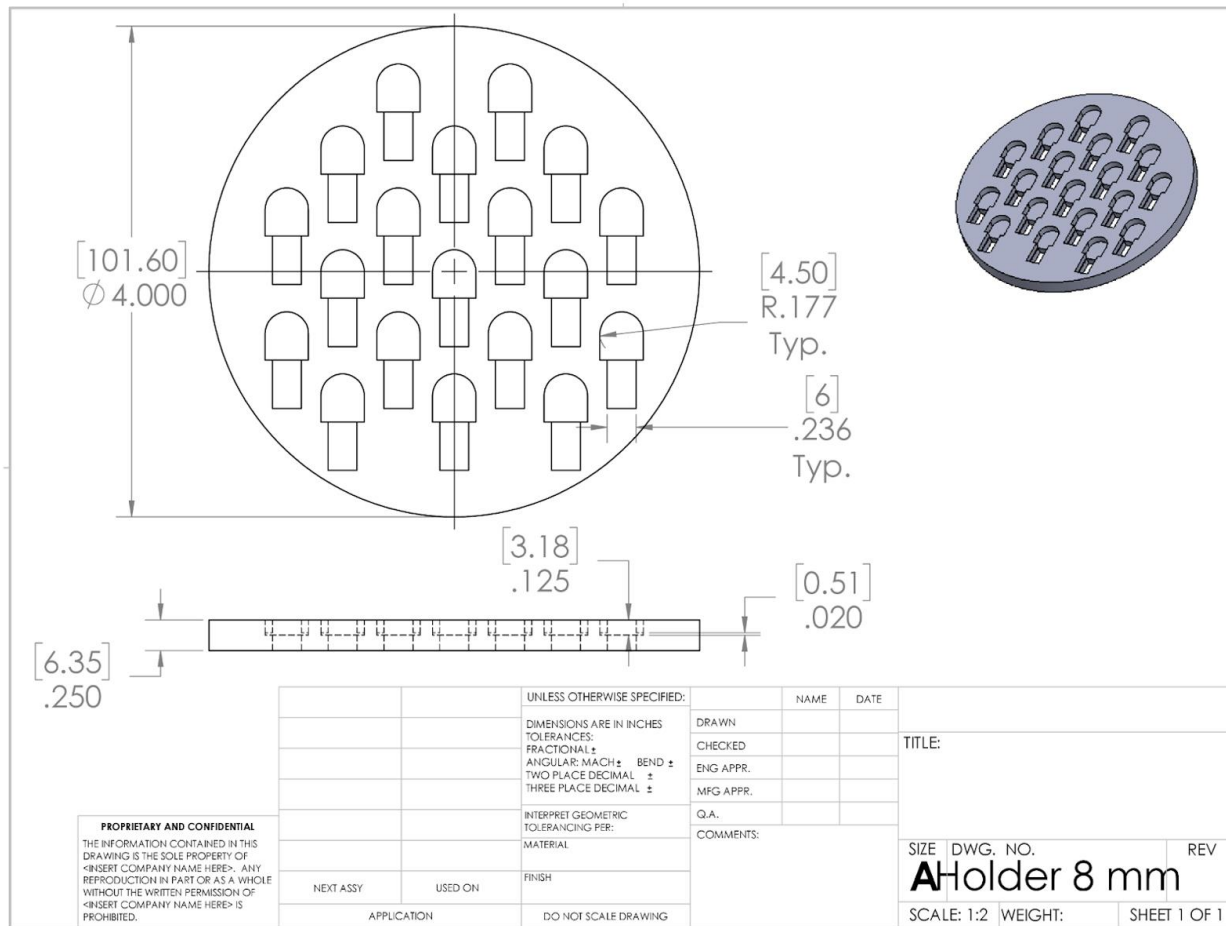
Dimensions and 3D rendering of fixture design produced in SolidWorks
